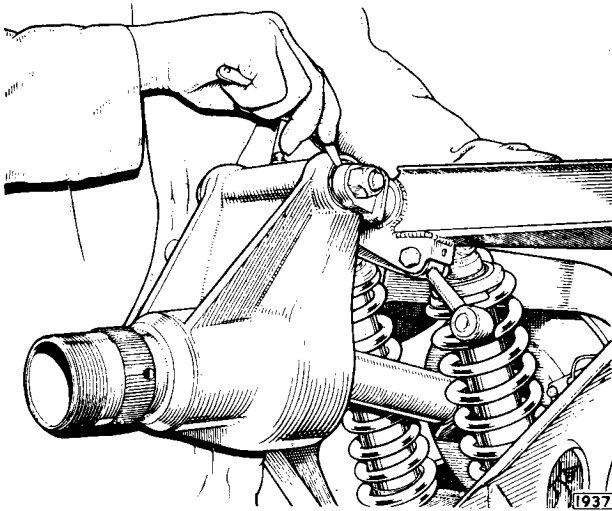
Using feeler gauges to measure the clearance between the hub carrier oil seal tracks and wishbone fork
